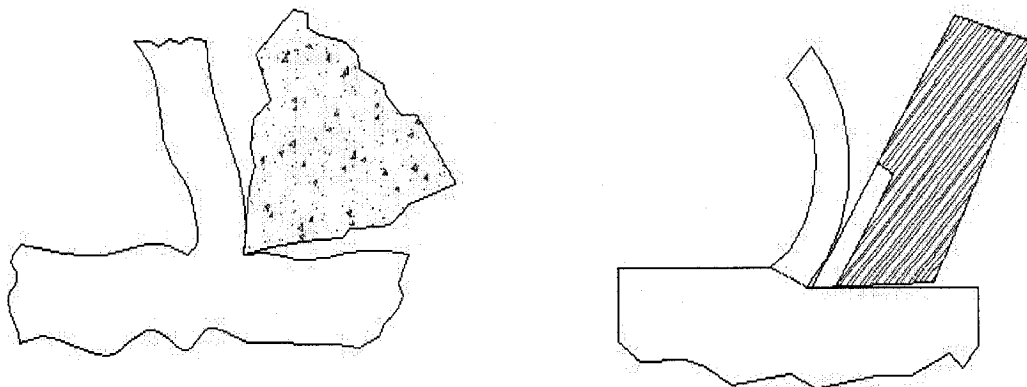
Cutting tool schematic. Probable form of ancient cutting implement (left) and modern metal cutting tool (right).
